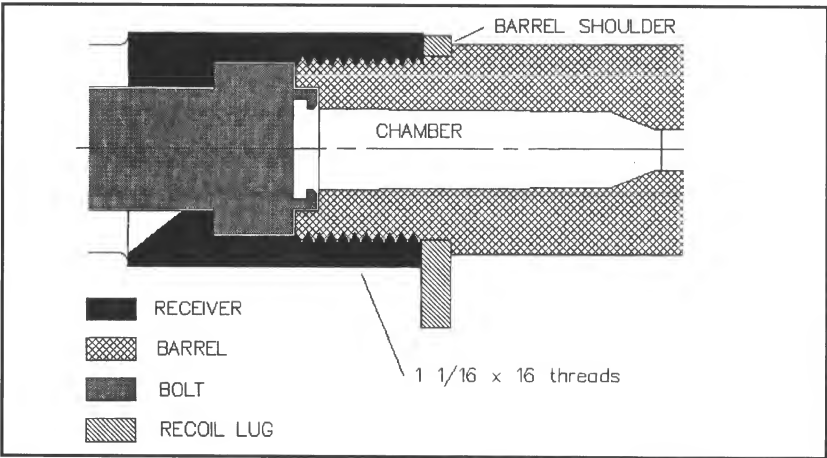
Drawing of the standard Remington 721 barrel joint design with National Form 60° V threads and recoil lug. It is equivalent to a standard bolt and nut joint, where the recoil lug serves as a washer.
